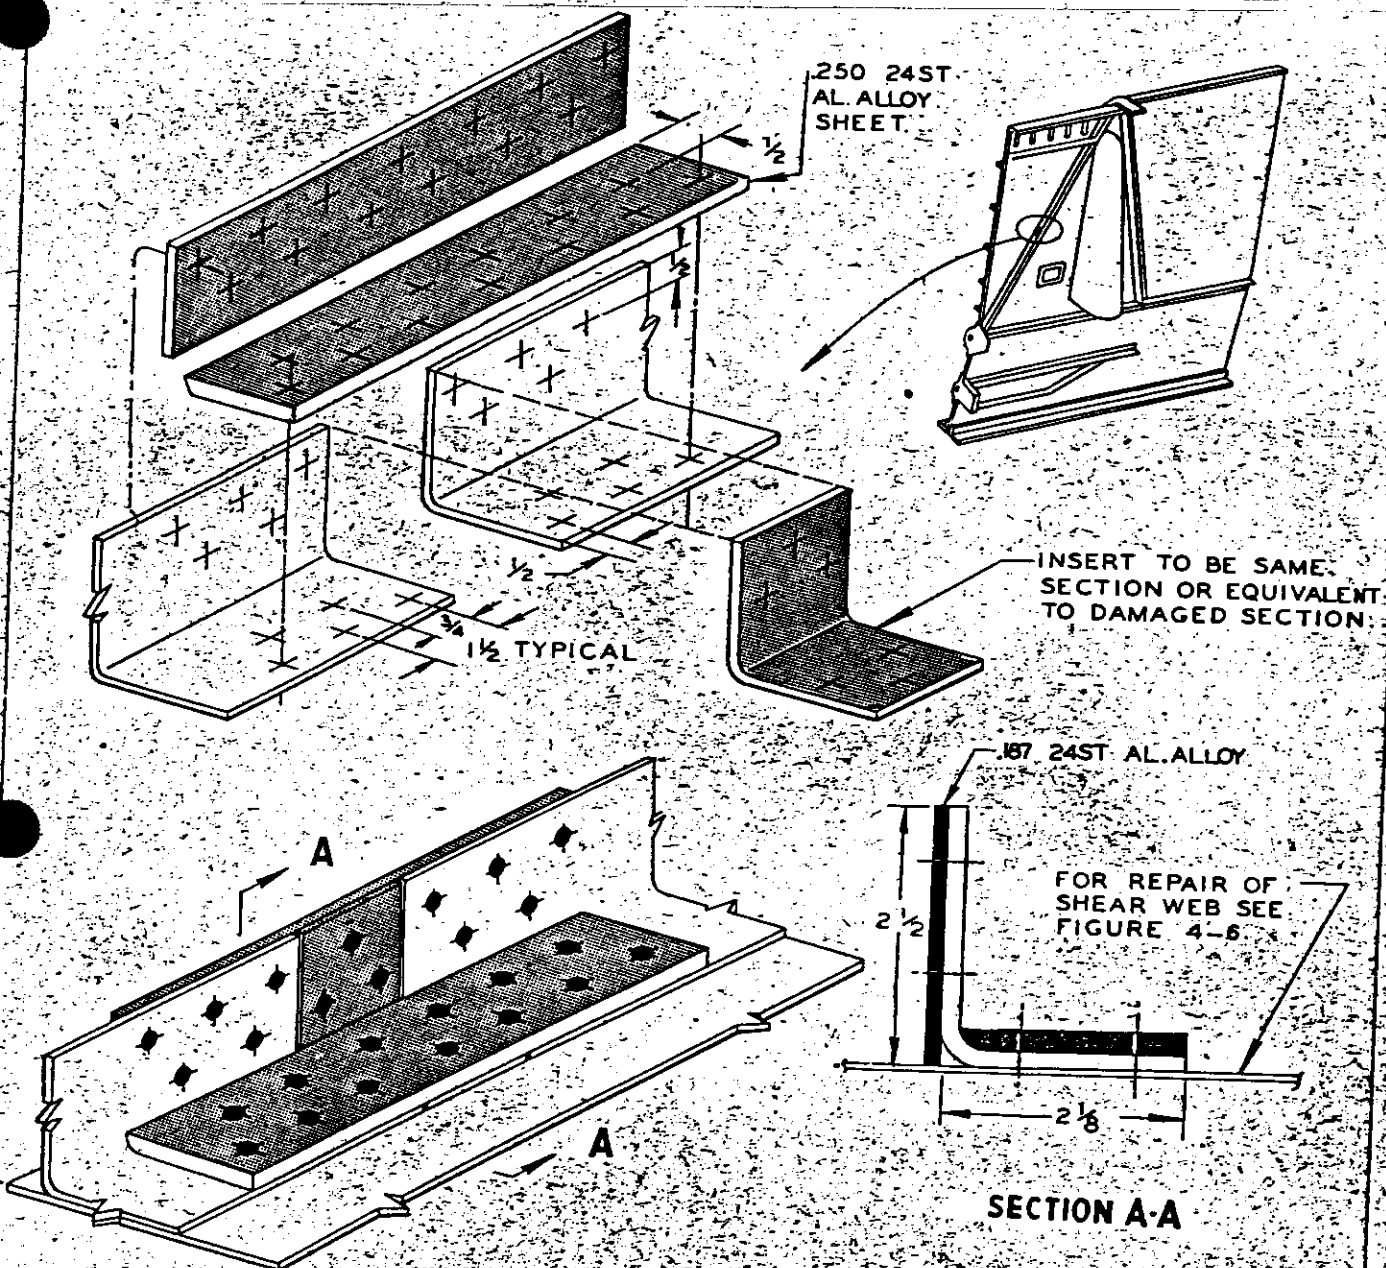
(Sheet 4 of 5 Sheets)—Main Wheel Well Enclosure Repair
